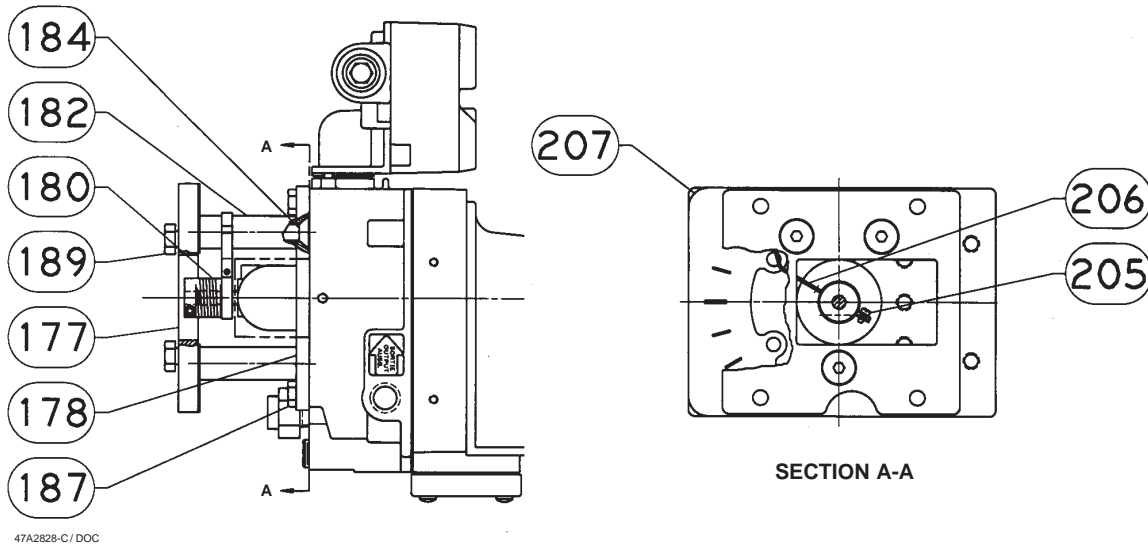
Type DVC5030 Digital Valve Controller Assembly for Replacing PMV Positioners
